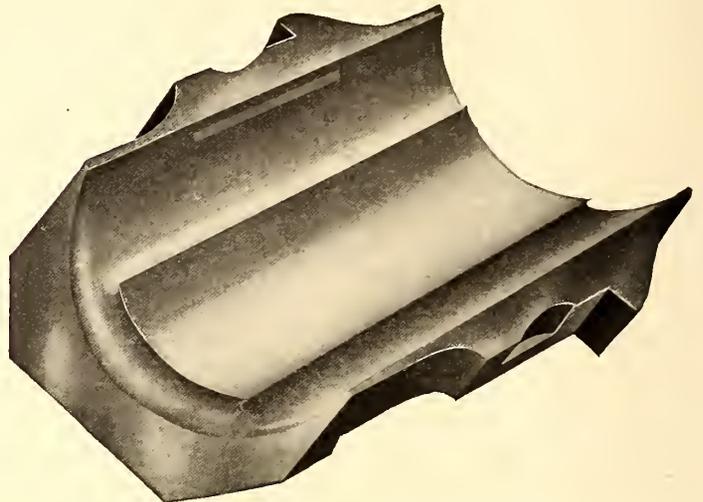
INSIDE VIEW OF CAR JOURNAL BEARING BEFORE BABBITTING, SHOWING THE CROWN OF BRONZE FITTED TO THE EXACT SIZE OF THE JOURNAL
